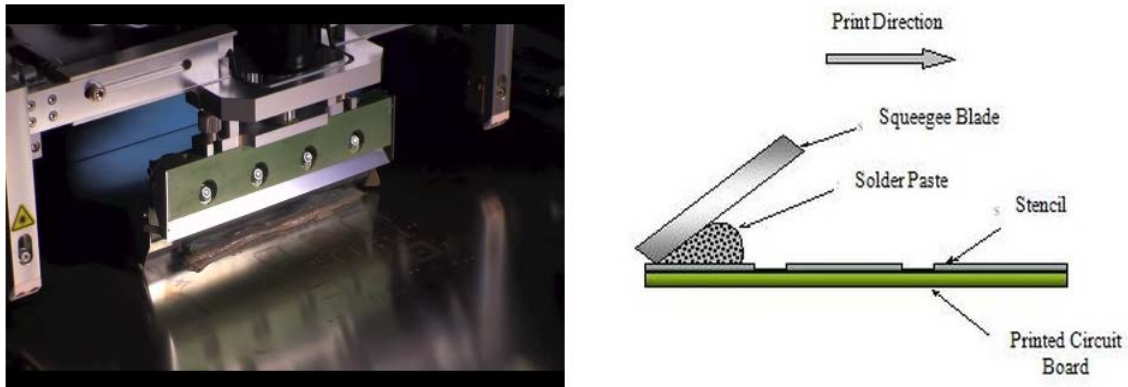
Squeegee blade printing process (left), cross-section representation of squeegee blade printing (right) [32]
